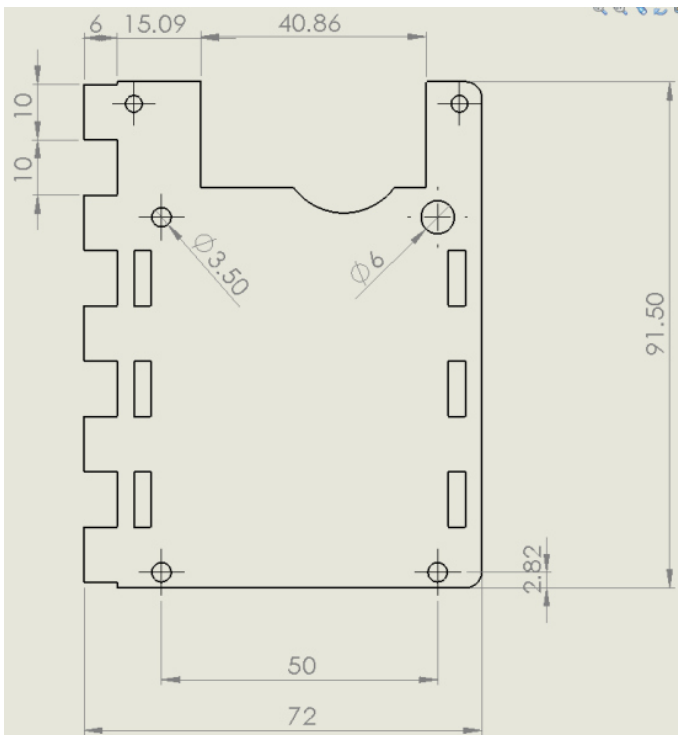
'Testbench Upright 1'. Testbench dummy toolhead mounting platform
